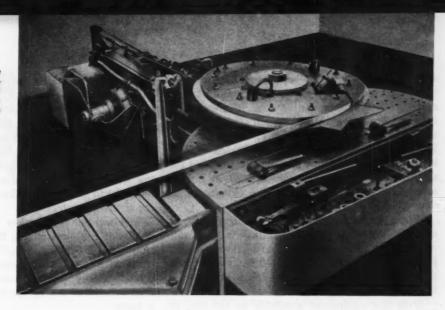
Type of machine employed in the stretchforming of extruded and rolled sections. Parts can be formed around complete circles.
